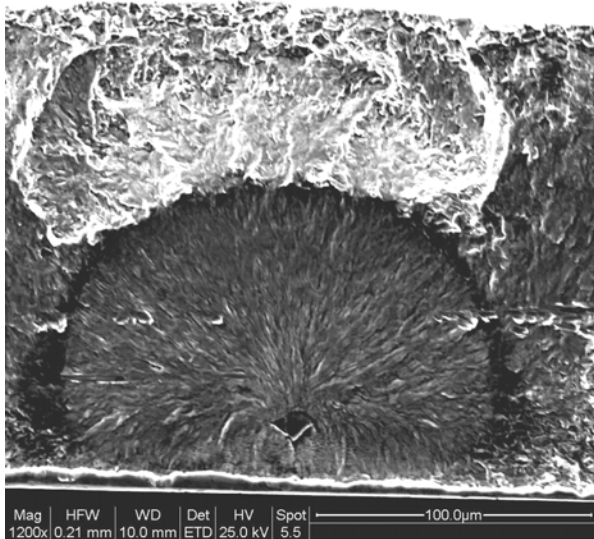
Typical “fish-eye” fracture morphology due to fatigue crack initiation at a sub-surface TiN inclusion in a push-belt ring.
